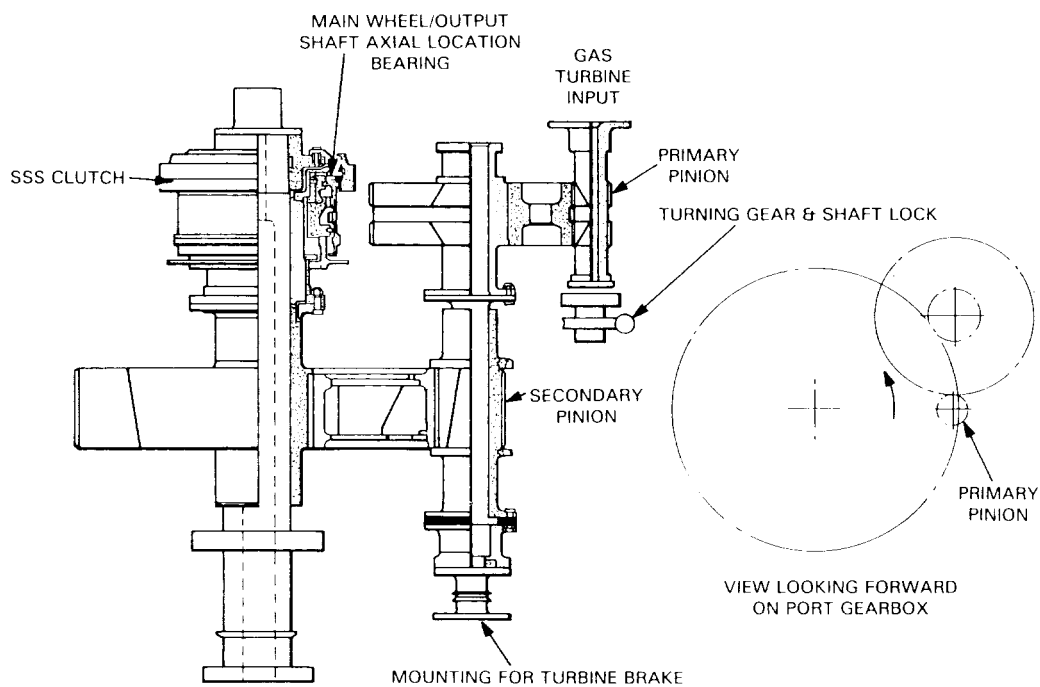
TYPE 23 GEARBOX CONFIGURATION
